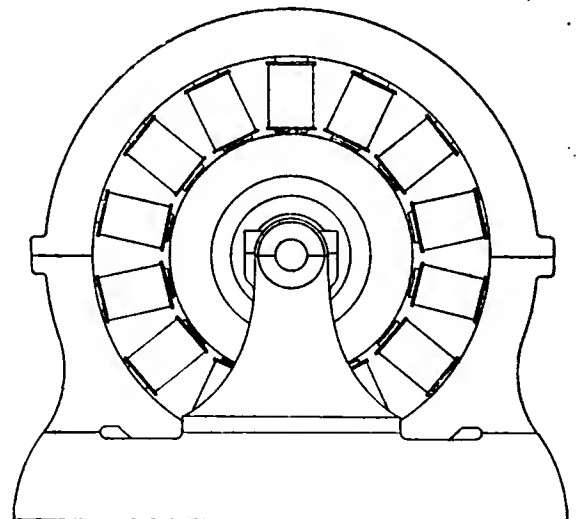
END VIEW OF GENERATOR OR CHARGING DYNAMO.
